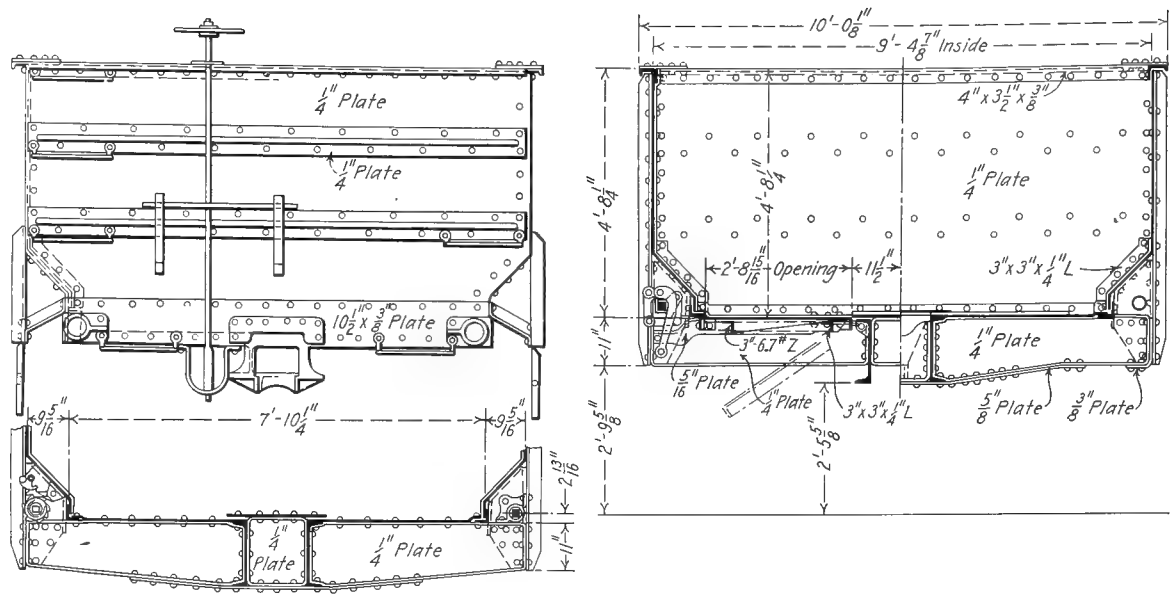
Cross Sections and End Elevation of All-Steel 50-Ton Capacity Side Dump Gondola Car Shown in Fig. 324.
